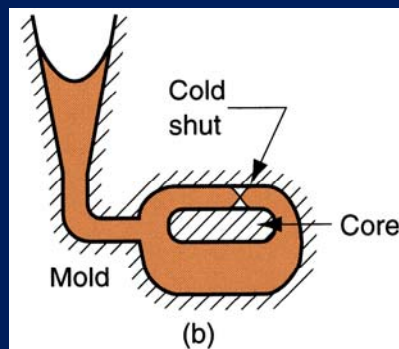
Some common defects in castings: (b) cold shut
